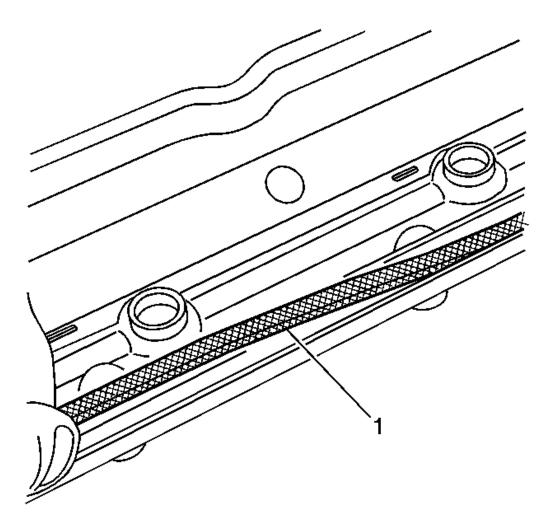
Rocker Arm Cover Gasket Courtesy of GENERAL MOTORS CORP.
